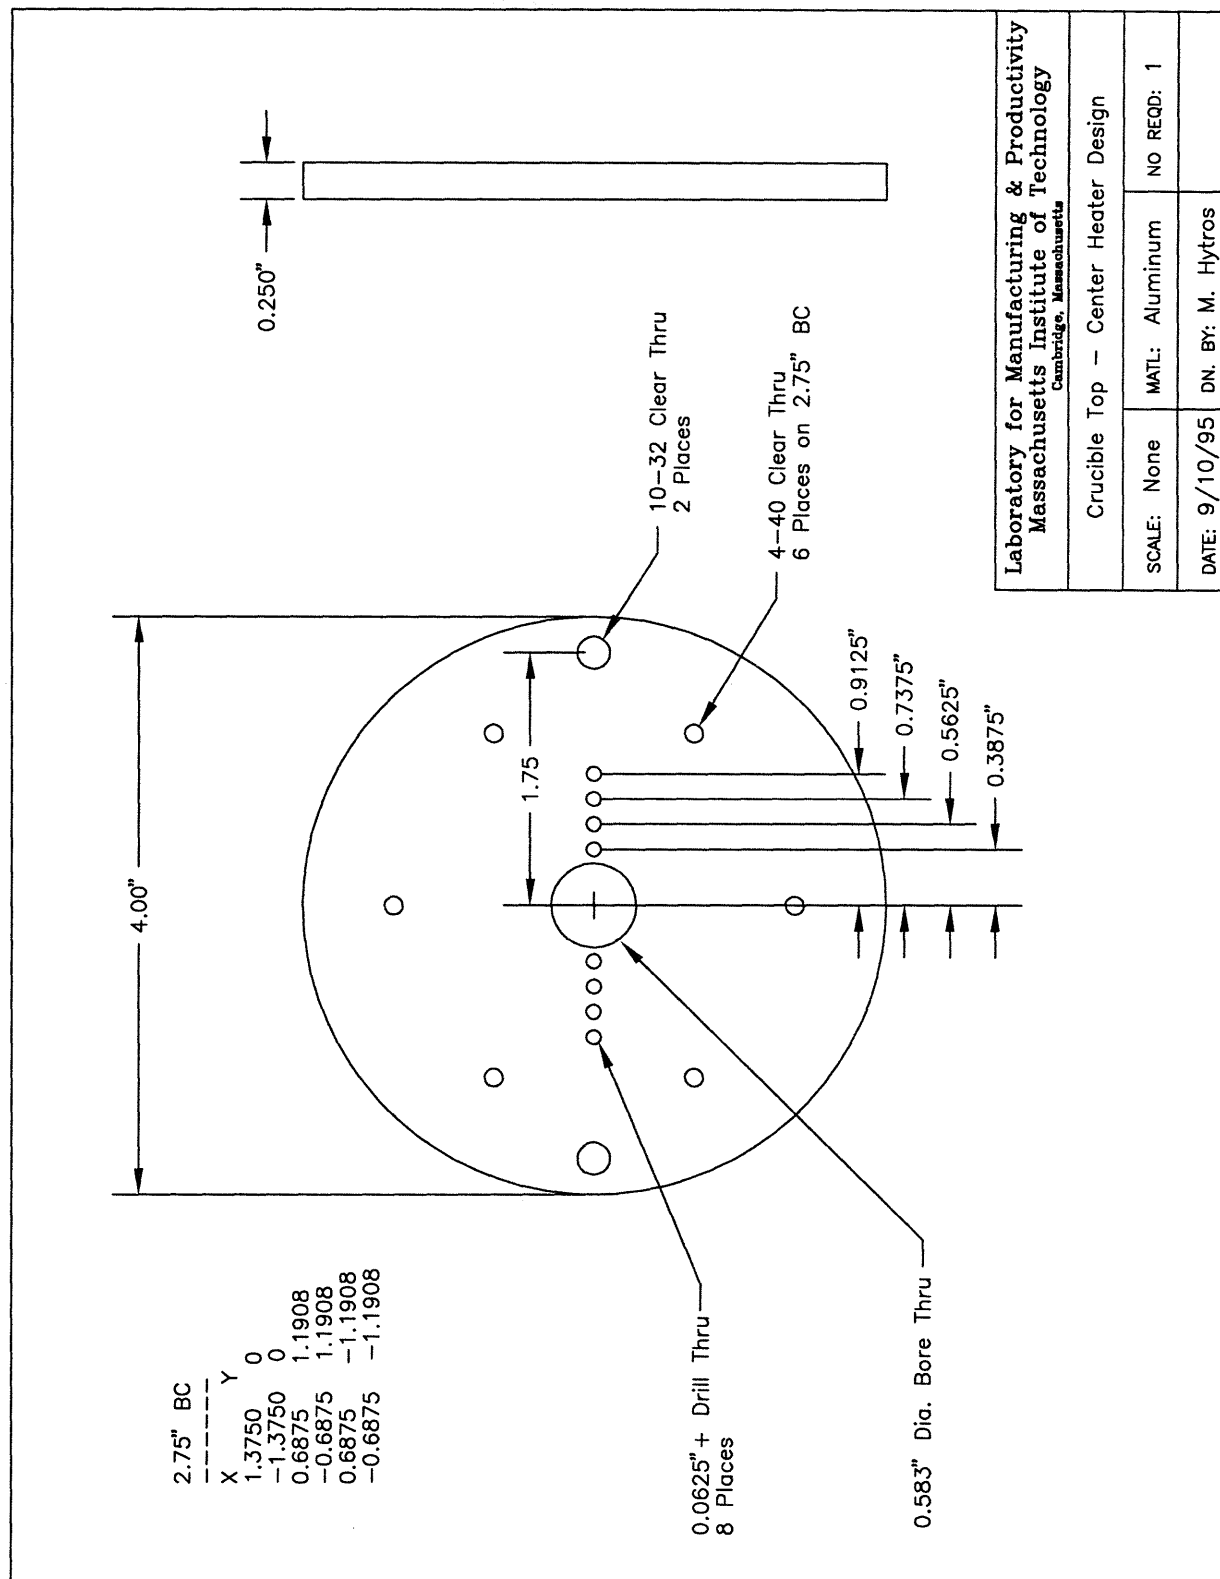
Detail Drawing of Crucible Top - Center Heater Design
